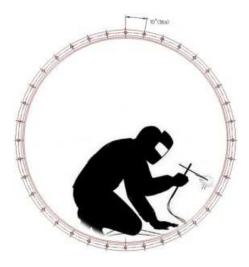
Worker's starting position when spot welding in a cylinder.
